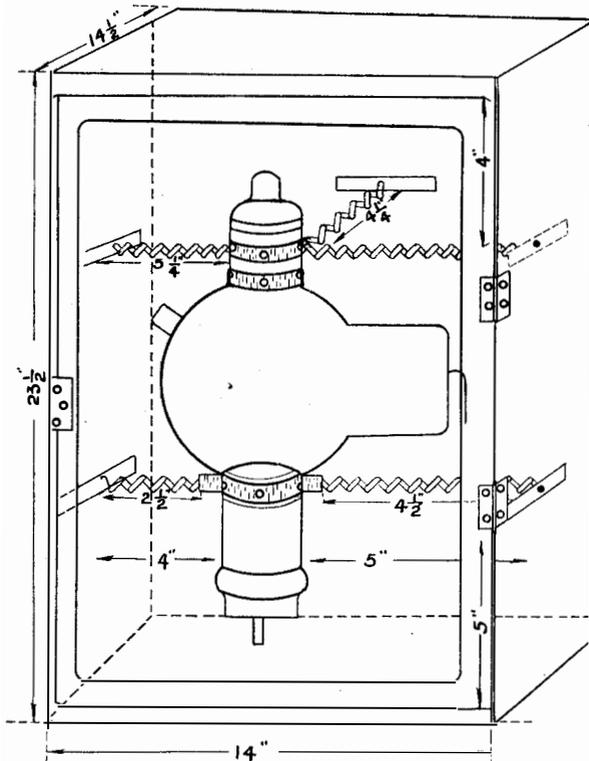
Drawing showing outline of protective cage for type 861 spare vacuum tubes.
